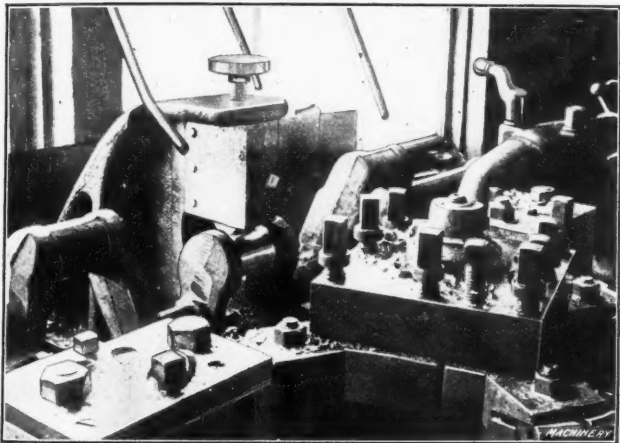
Facing up Crankshafts to provide the Necessary Wheel Clearance
